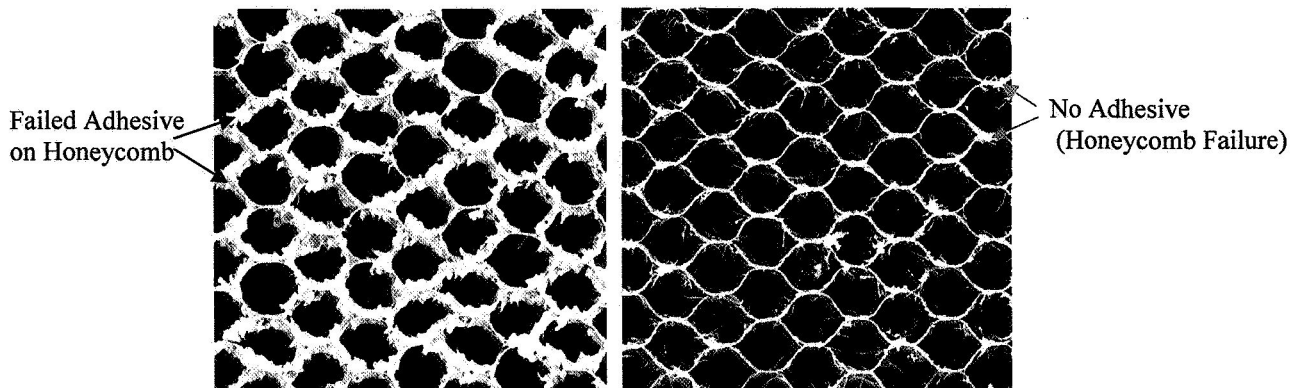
Surfaces of honeycomb after CDP tests for a bondline failure (left) and core failure (right).
